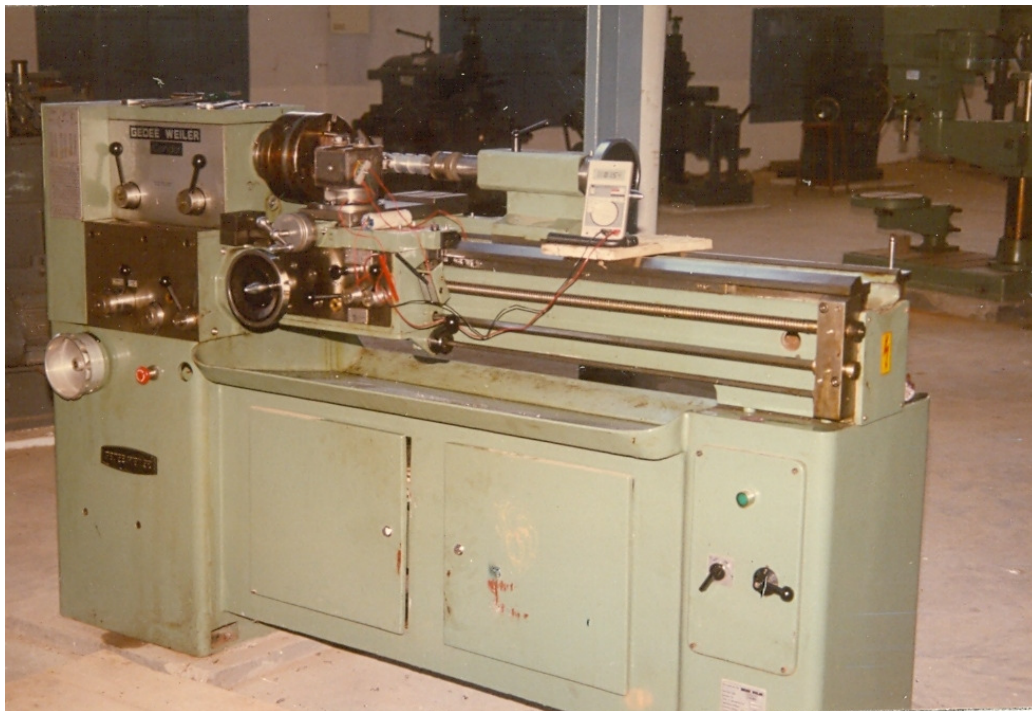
Photograph of experimental set up of Roller burnishing process on lathe
